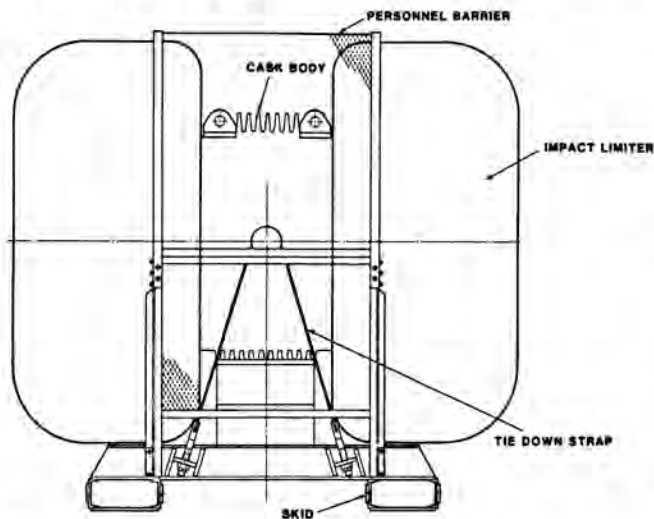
Cask Assembly Showing Personnel Barrier & Skid
